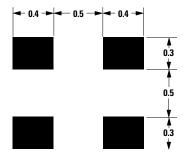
PCB Pad Layout, MiniPak (dimensions in mm).
